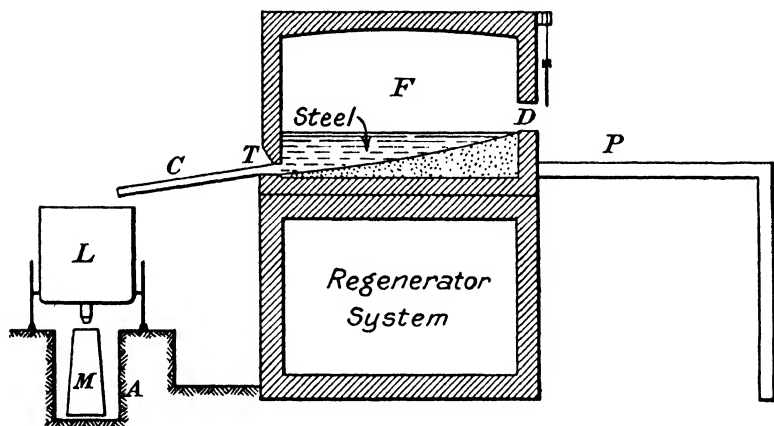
Open-hearth Steel Furnace and Casting Pit (Cross-section).
